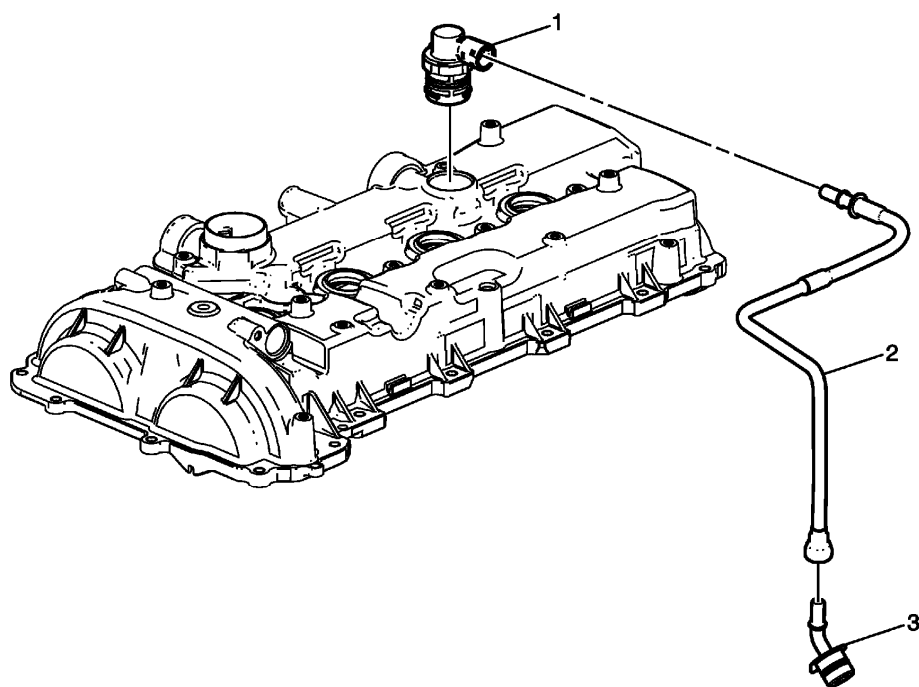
Camshaft Cover -- PCV Valve Components for Turbocharger Models
